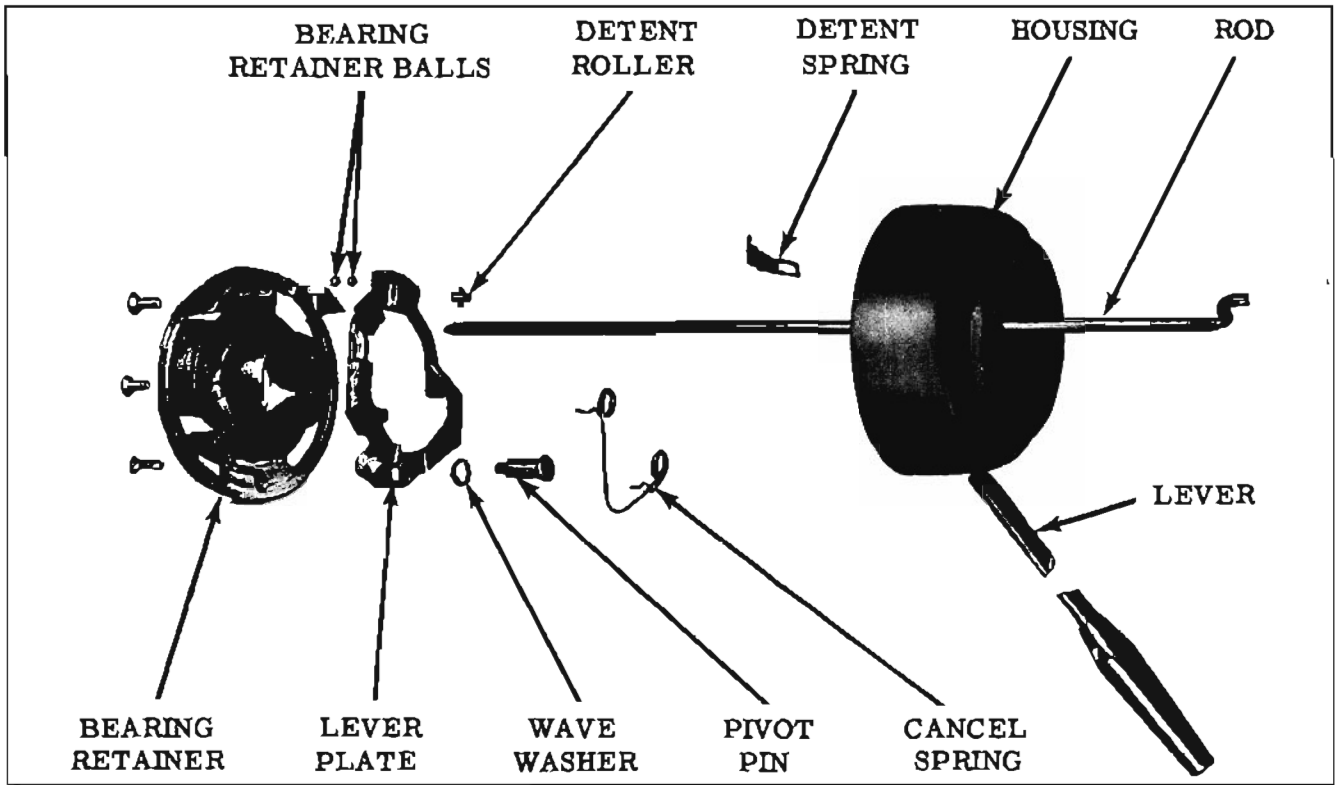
Turn Signal Actuator Assembly (33 - 34 - 35 - 36 - 38 & 39 Series)
